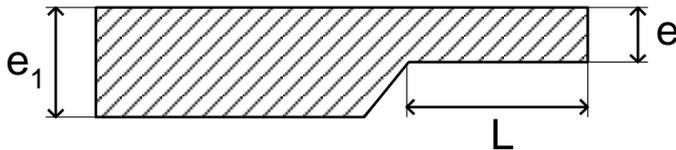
cross section of the pipe wall at the side of the butt weld.
